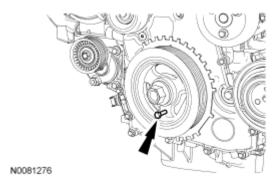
Identifying 6 mm x 18 mm Bolt Courtesy of FORD MOTOR CO.
